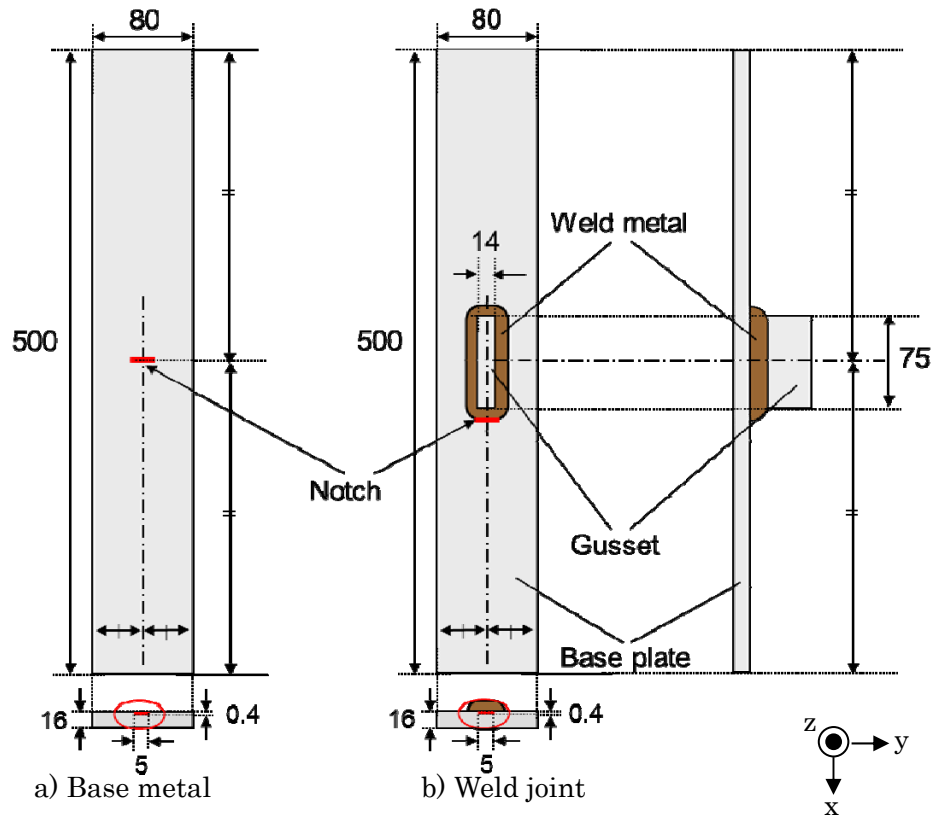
(1) Test specimen (non-peening / as weld)
